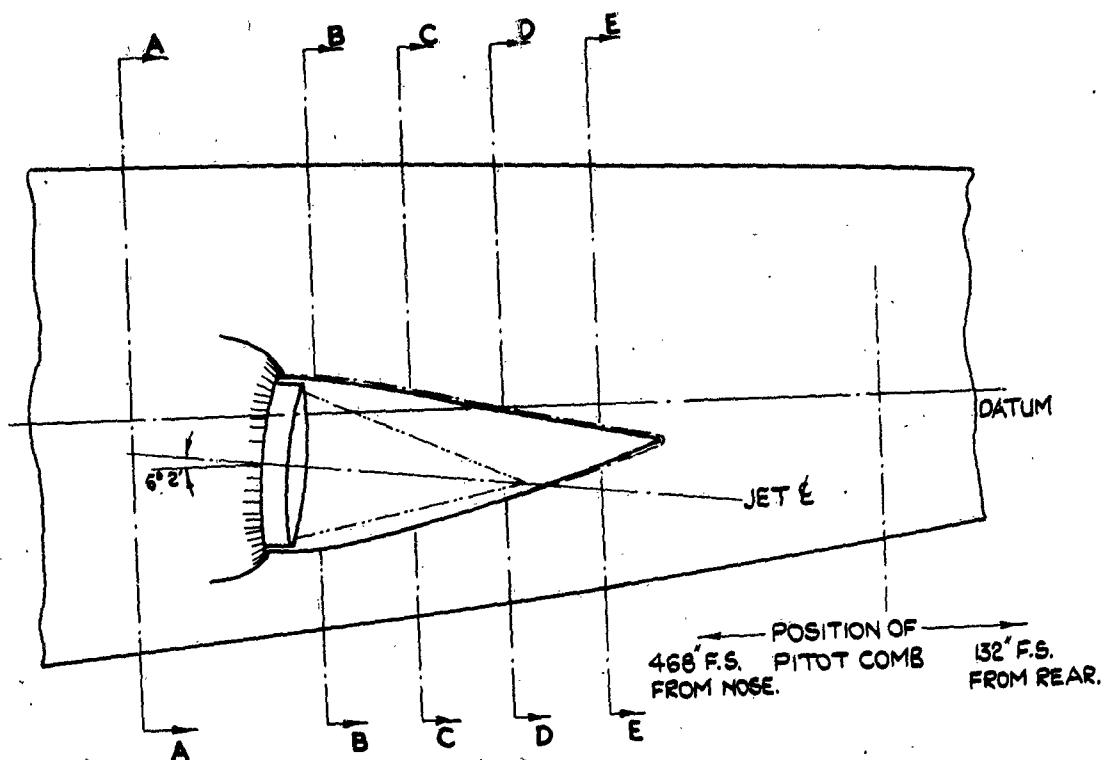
JET EXIT FILLETS, SIDE & PLAN VIEWS.
